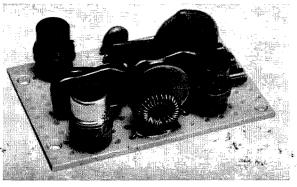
Component identification is shown here. Because of the small size of the assembly, component leads may be simply bent over and used as indicated, instead of a printed circuit.
